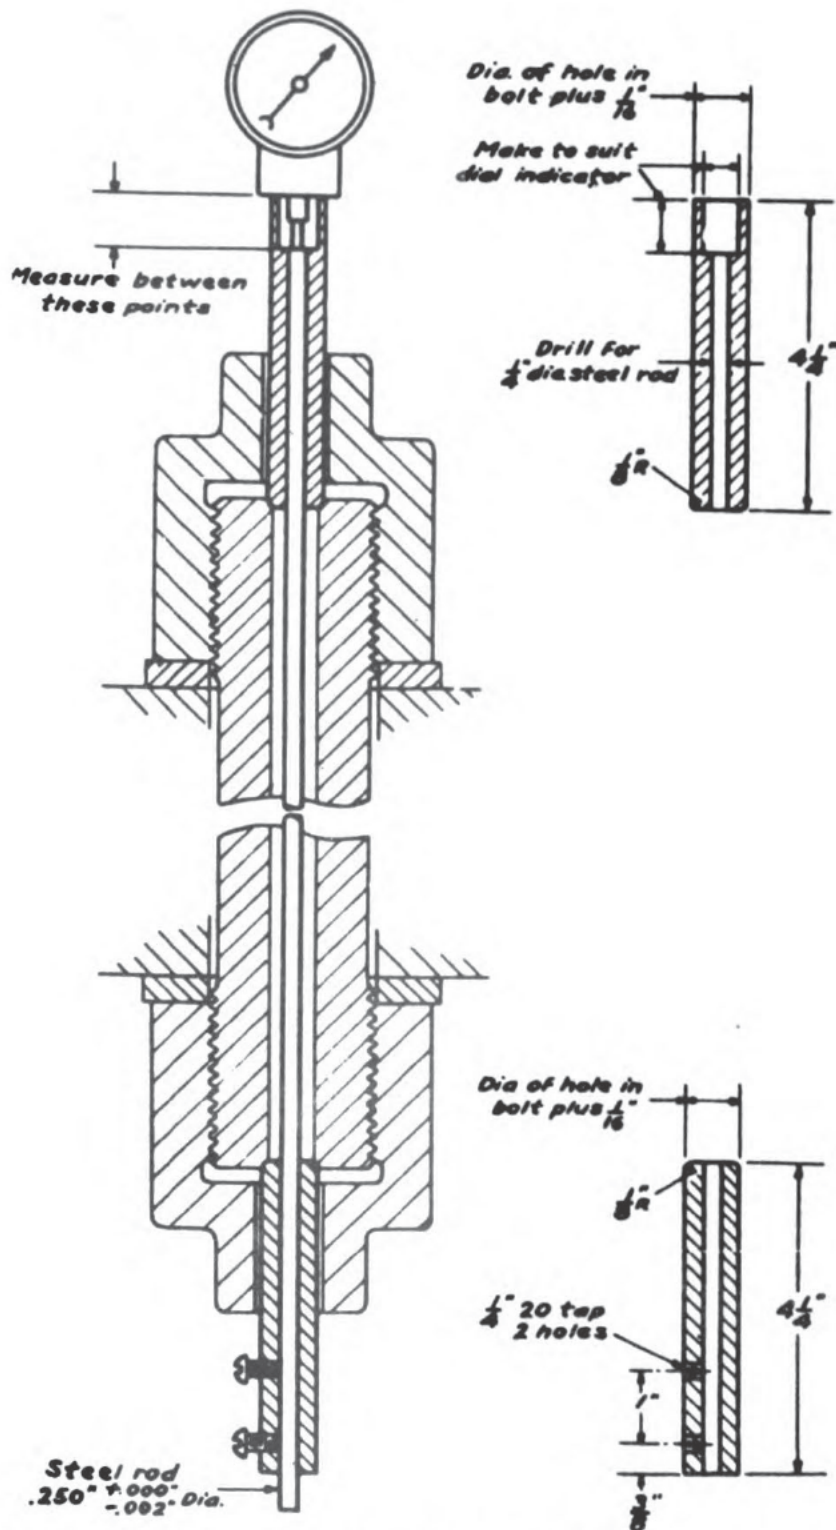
Device for measuring elongation of bolts (hole in nut is larger than hole in bolt).
